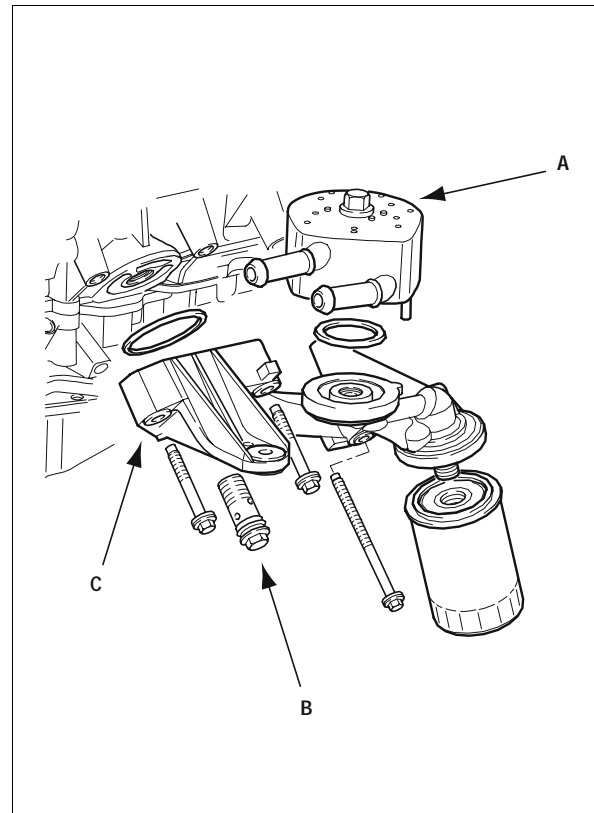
OIL COOLER AND FILTER ASSEMBLY (2000 MY S-TYPE Shown)
